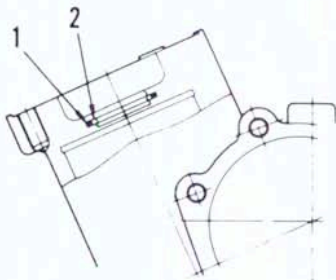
Be sure "O" ring (1) is installed behind Teflon seal ring (2) when reinstalling worm shaft seals in housing.
